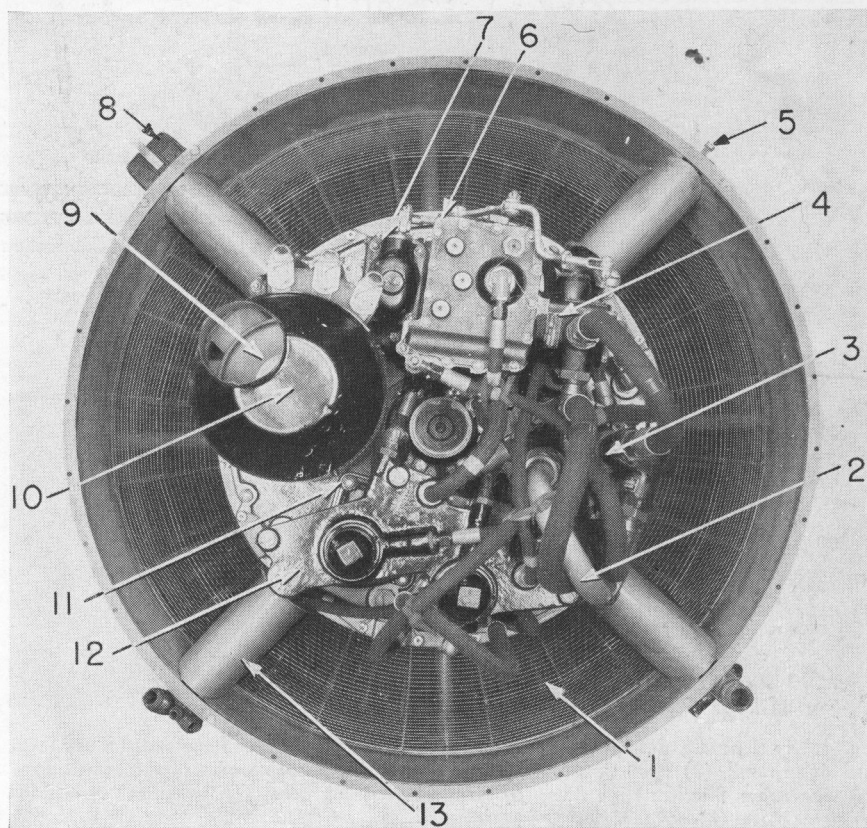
Front of the TG-180 turbojet showing accessory arrangement: (1) air-inlet screen; (2) fuel-inlet connection; (3) fuel pump; (4) high-pressure stopcock; (5) engine control shaft; (6) fuel control regulator; (7) engine governor; (8) terminal box for starter-generator leads; (9) starter-generator cooling air inlet; (10) starter-generator; (11) hydraulic pump pad cover; (12) oil filter assembly; (13) accessory piping "island."
